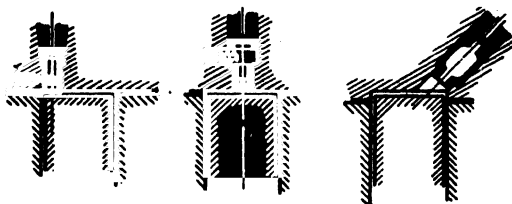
Antechamber injection arrangements. Combustion chambers shown are of the following engines, the bore of the engine in inches being indicated: left, Deutz, $4\frac{1}{2}$; center, Mercedes-Benz, 4.13; right, Hill, $3\frac{1}{2}$ and 5.
